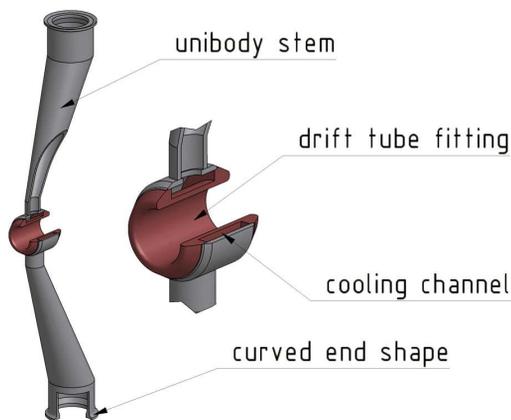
Cross sectional view of an inclined stem with a detail of the drift tube
